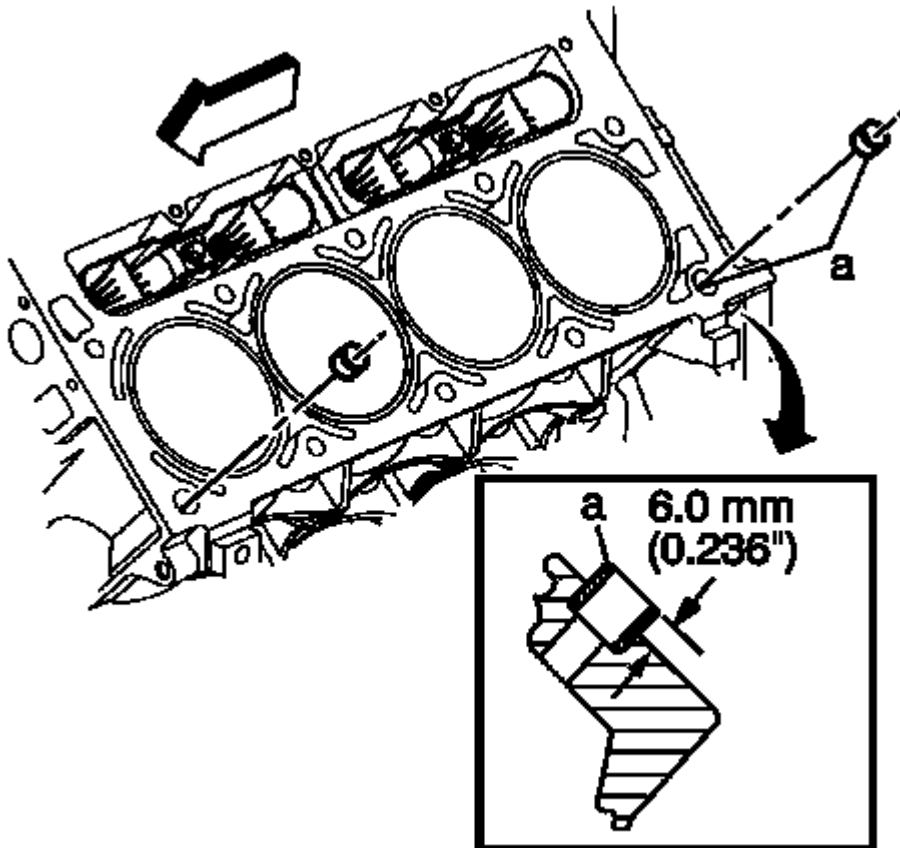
Identifying Cylinder Head Locating Pins Installation Position
